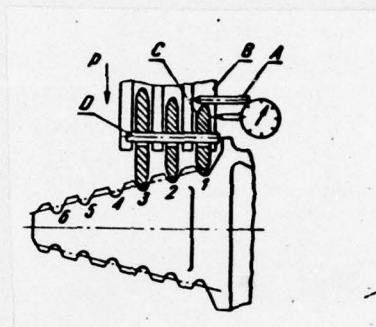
Schematic of burnishing of rows of blade locking pieces:
